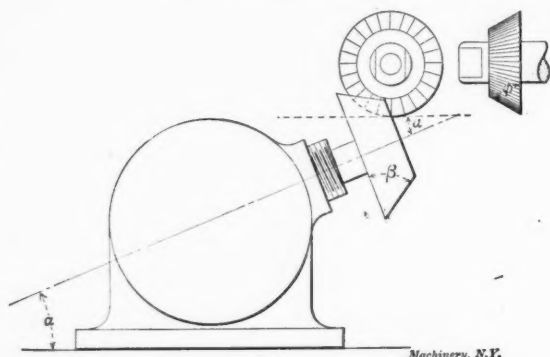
Diagram of Head, Blank, and Cutter for Milling Teeth.
